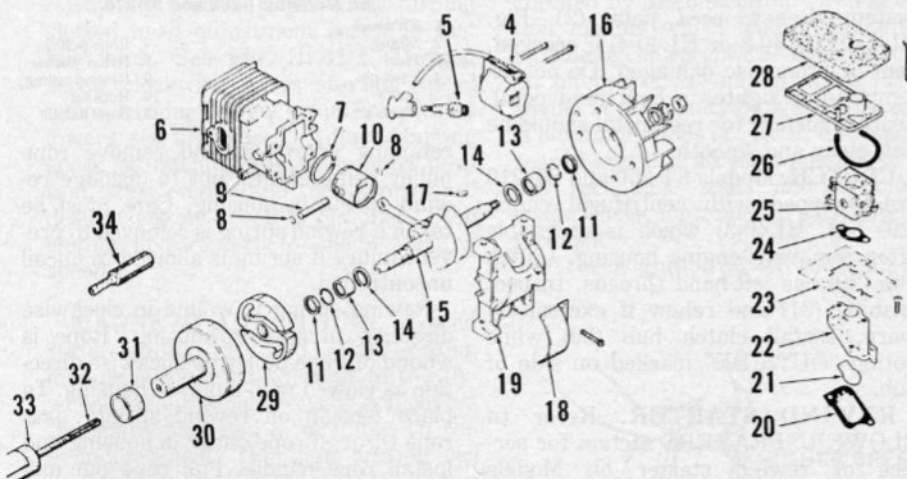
Exploded view of engine used on Models ST-160, ST-180, ST-200 and ST-210; adapter (34) is used in place of clutch components (29, 30 and 31) on Models ST-160 and ST-180. Model P100-1 Waterbug is similar but clutch components are not used. Thrust washers (14) on Model P100-1 are equipped with tangs which must index in crankcase (19).
